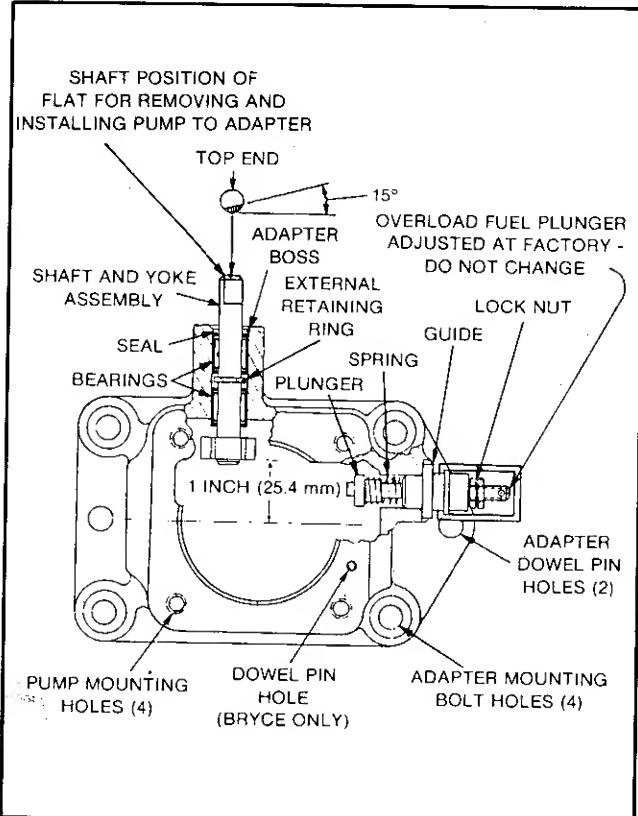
INJECTION PUMP ADAPTER ASSEMBLY
